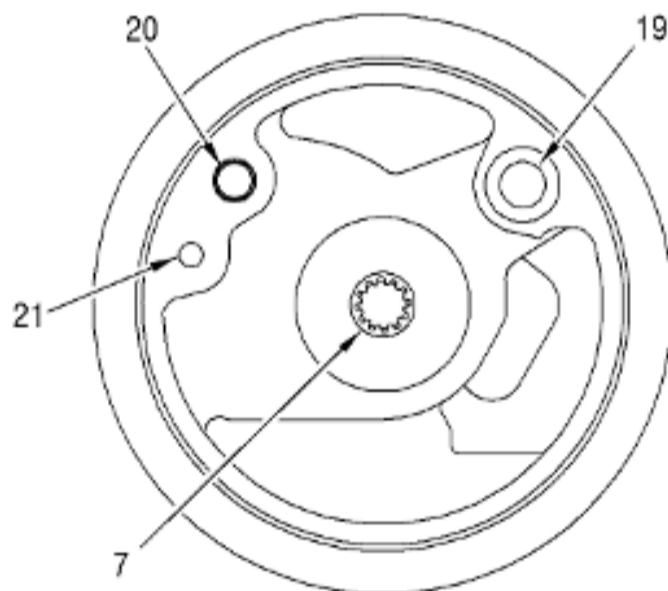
(Sheet 1) FMU and Grooved Clamp Coupling - Inspection
